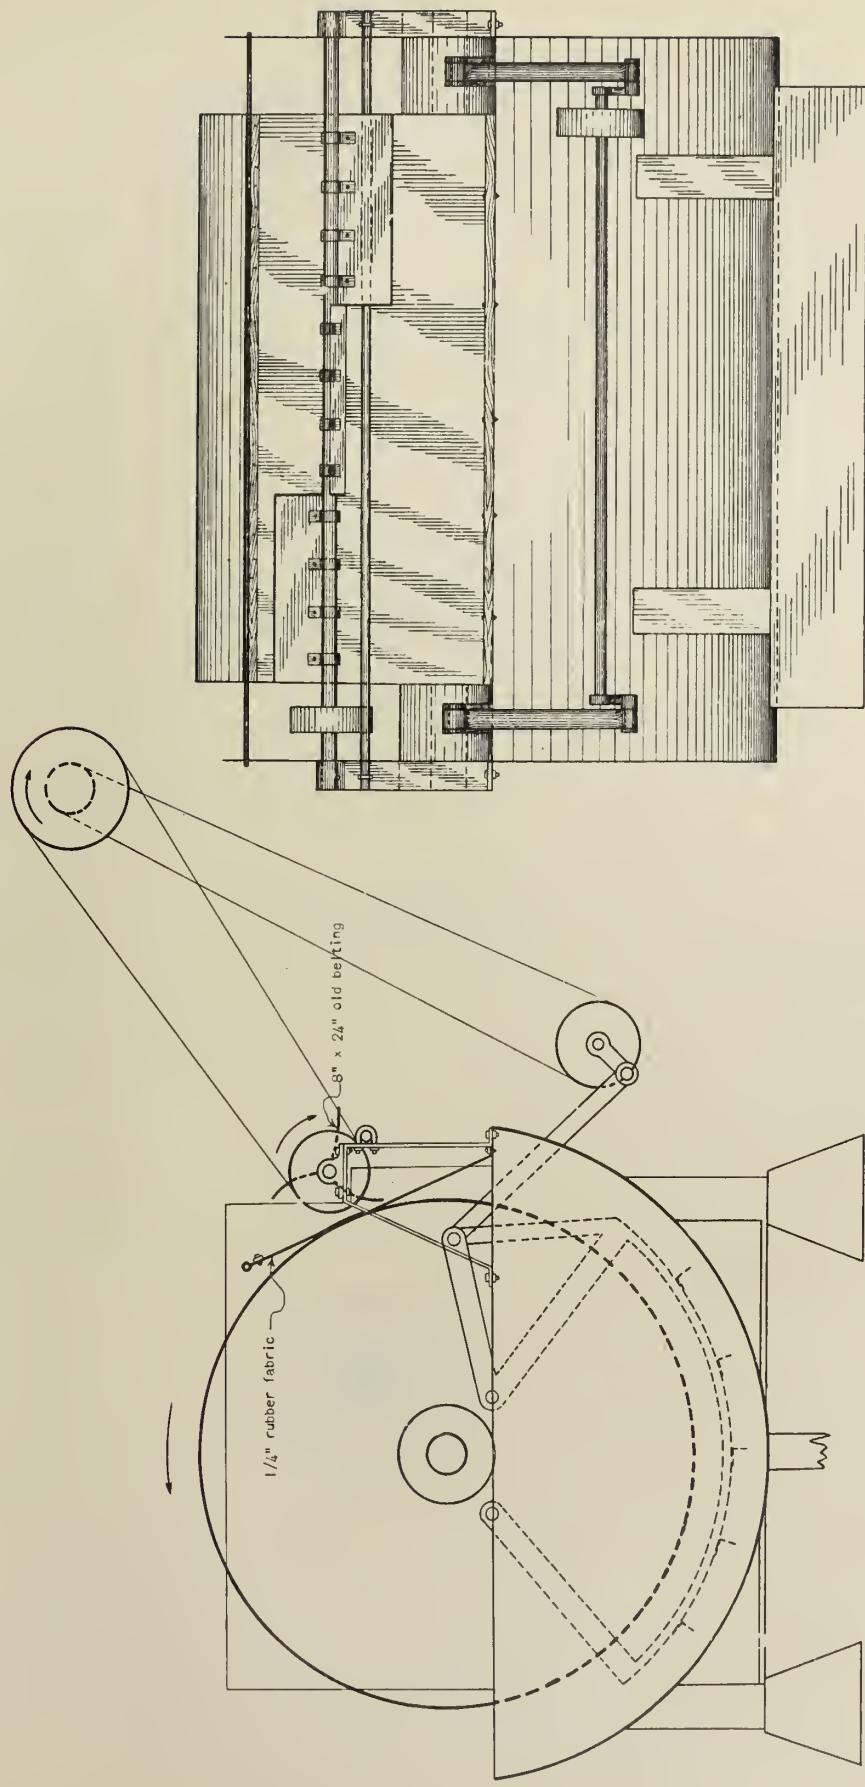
General arrangement of Oliver filter, showing rubber flappers for breaking film on filter cake.
